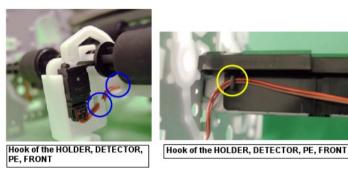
Hooks securing the PE SENSOR, FRONT harness
